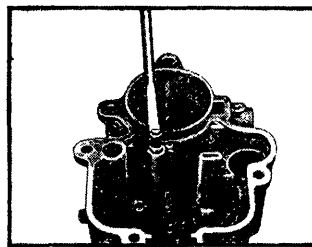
Install idle orifice tube and plug. Assembly must seat well in casting
